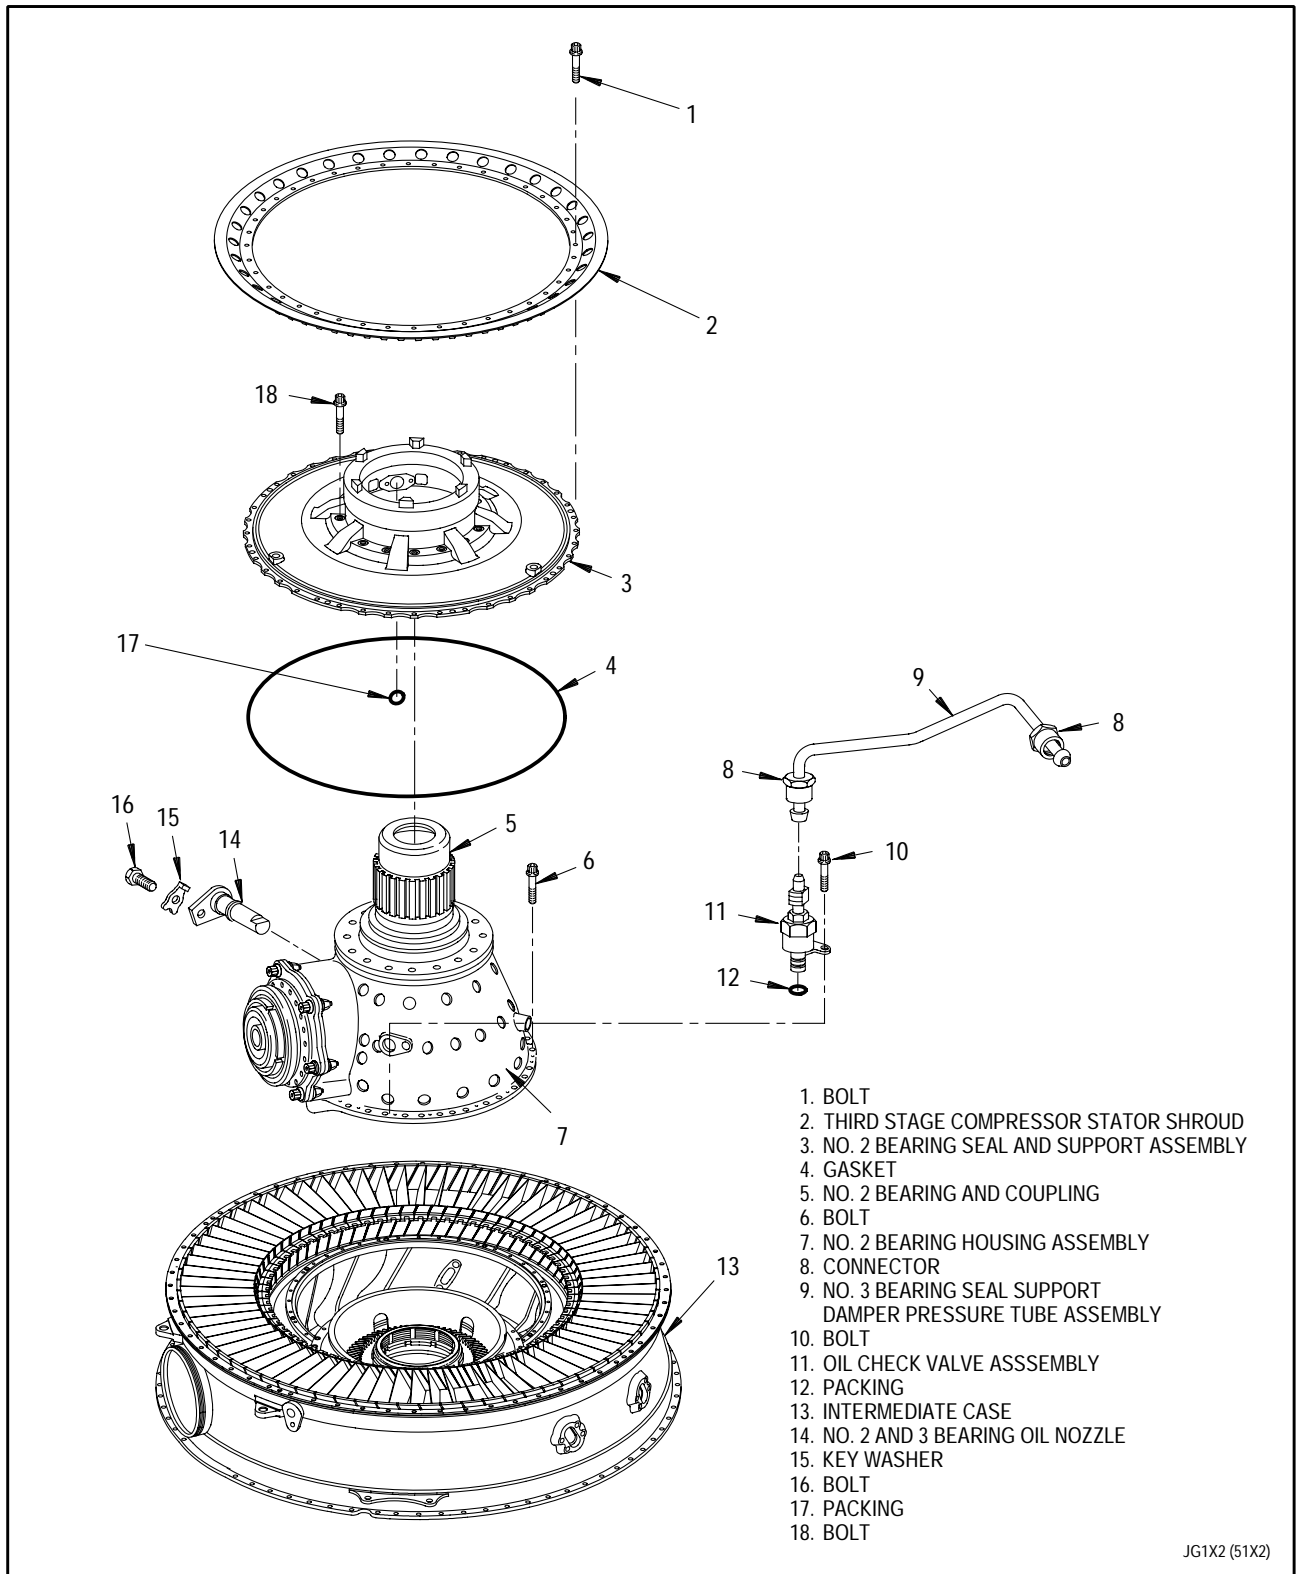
No. 2 Bearing Seal and Support Assembly and NO. 2 Bearing Package - Removal
